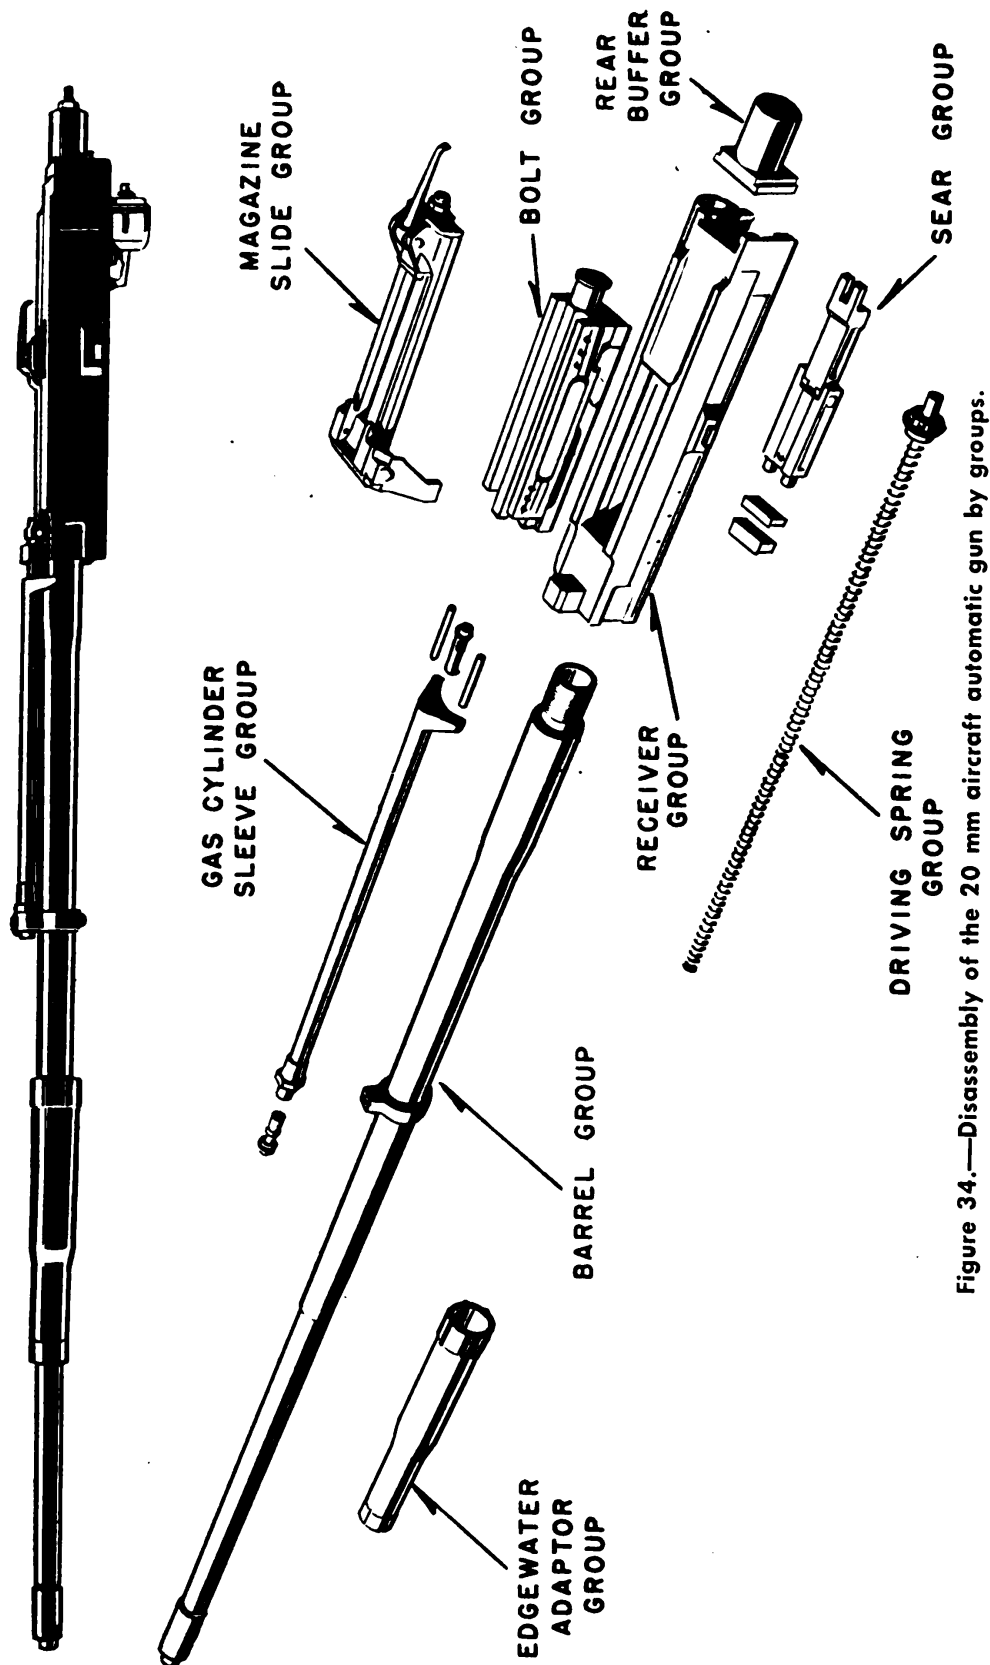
Disassembly of the 20 mm aircraft automatic gun by groups.
